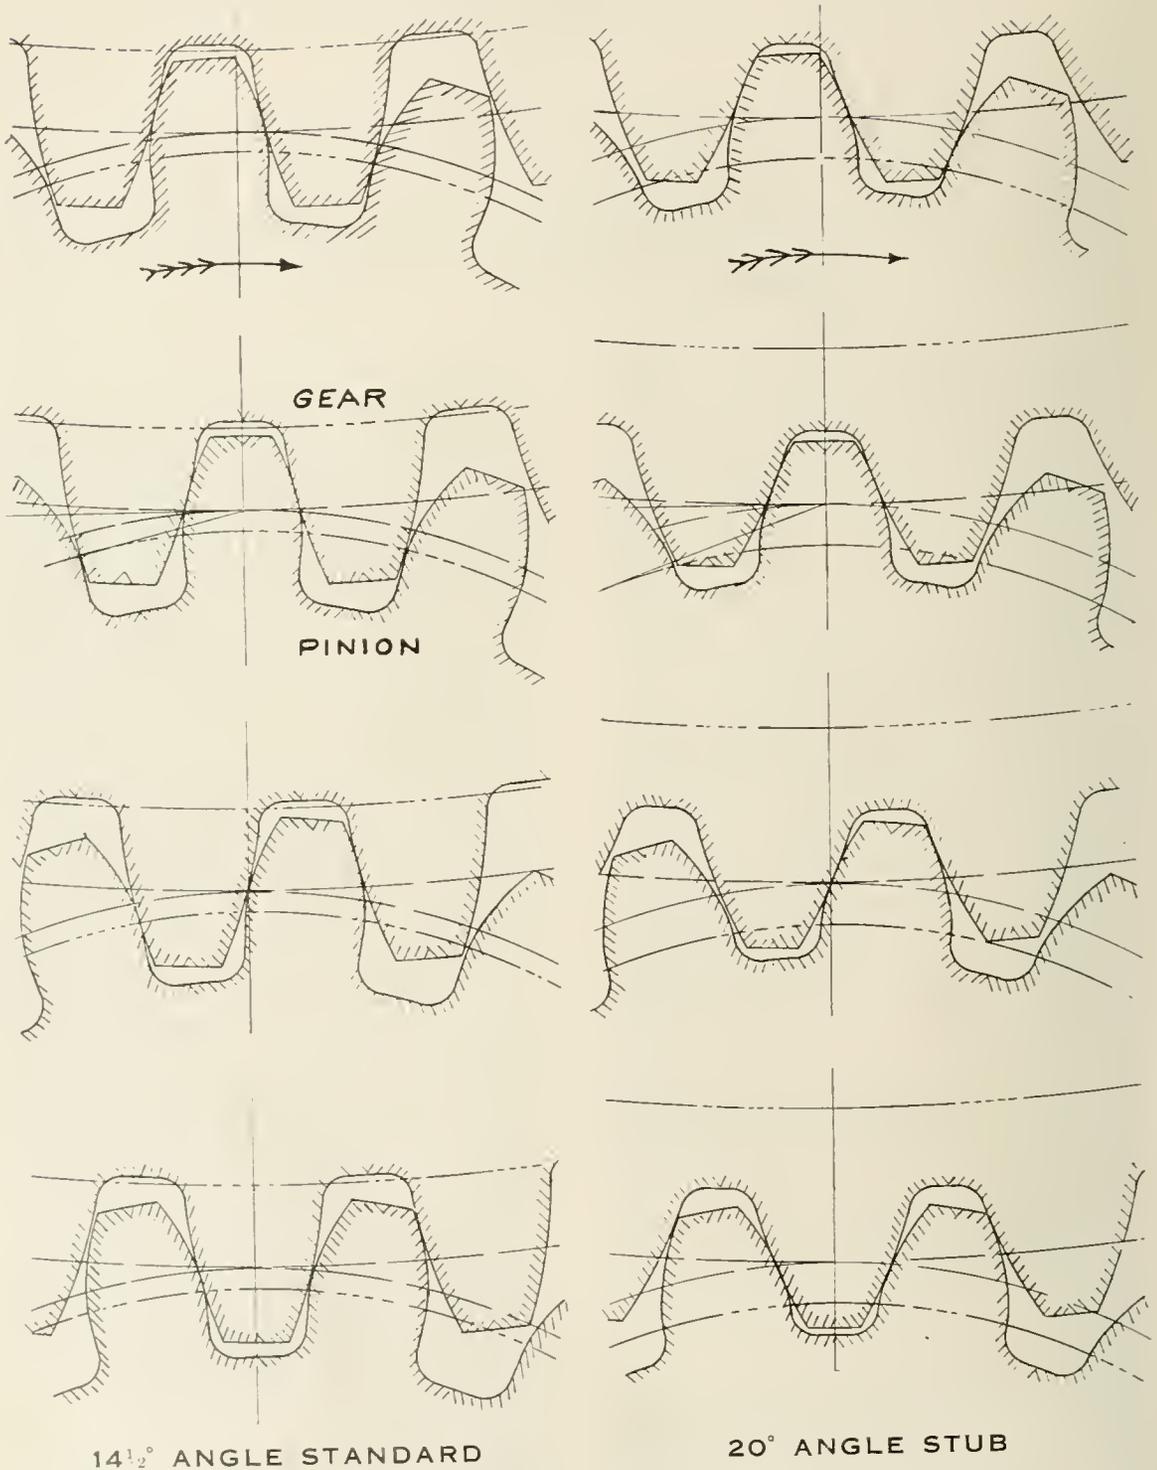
Four Different Mesh Positions of a 2½ Pitch, 18 Tooth Pinion, and 68 Tooth Gear
